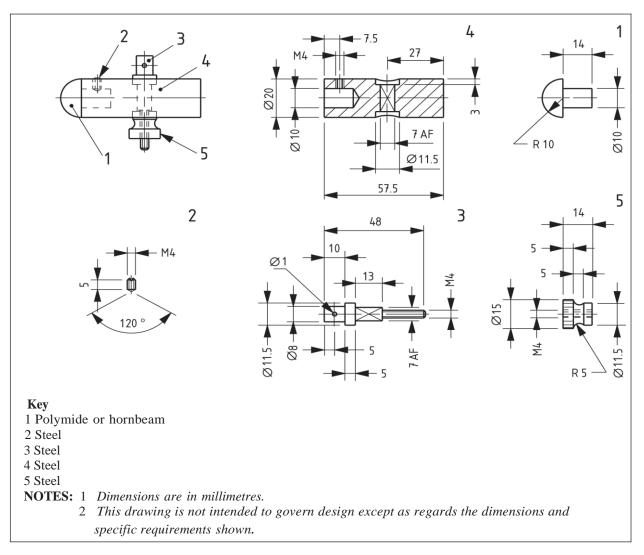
Pendulum impact test: Constructional details of striking elements (see 19)
